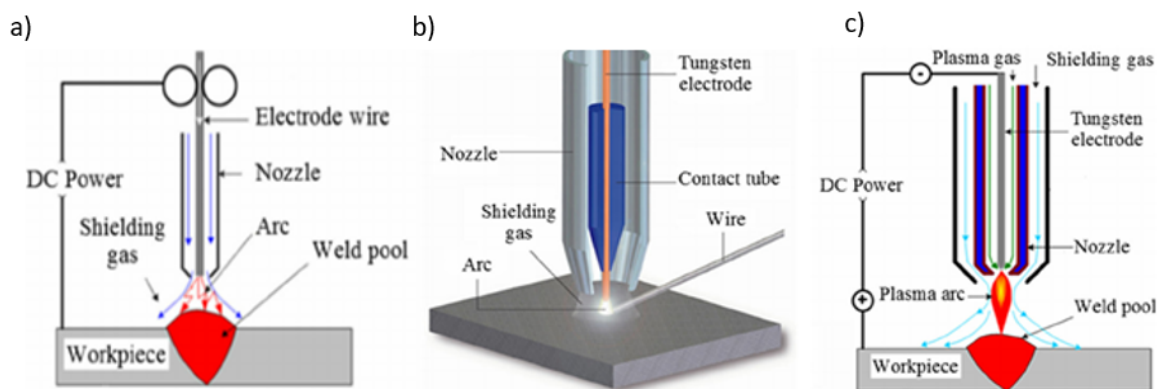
GMAW, GTAW and PAW welding variants, respectively [22].
